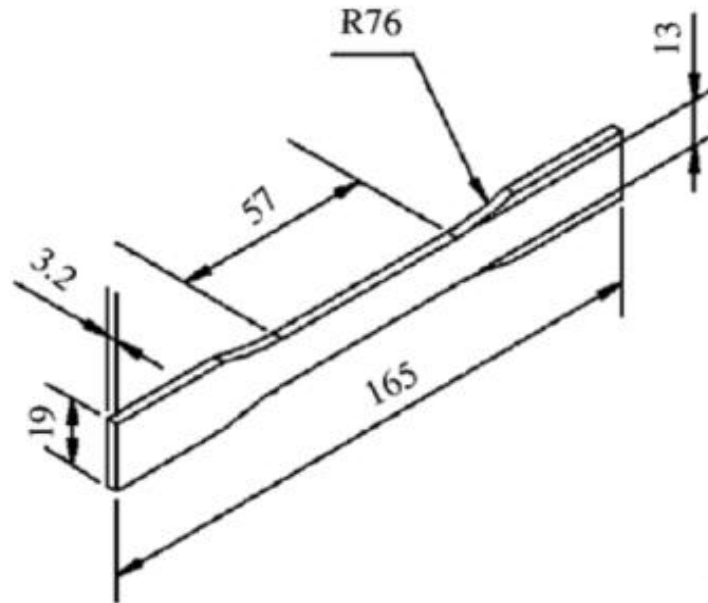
Tensile testing sample dimensions as per ASTM D638:2010
